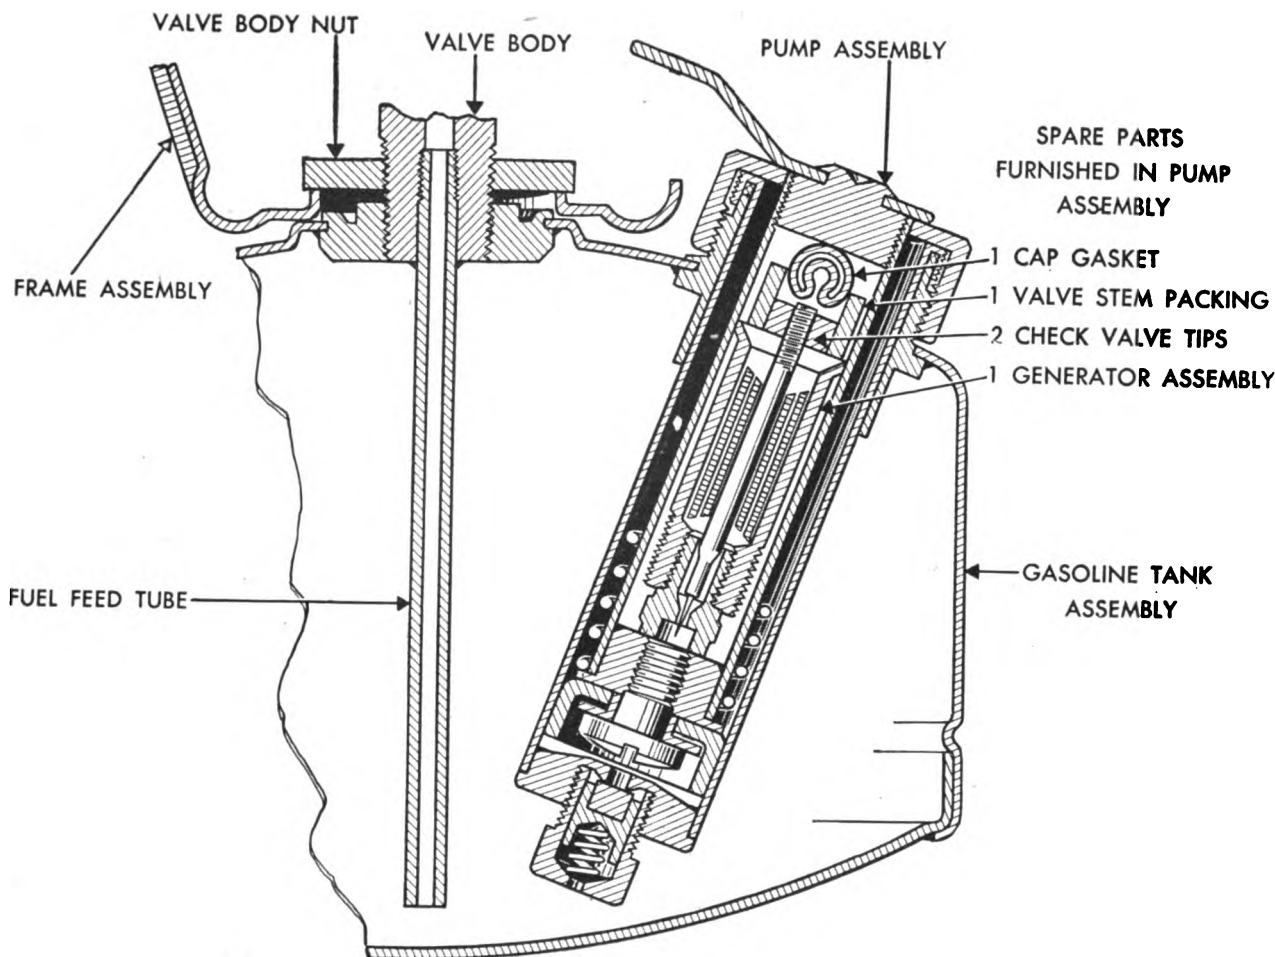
Detail of stove, cooking, gasoline, M1942, one-burner, modified, showing spare parts in pump assembly.
